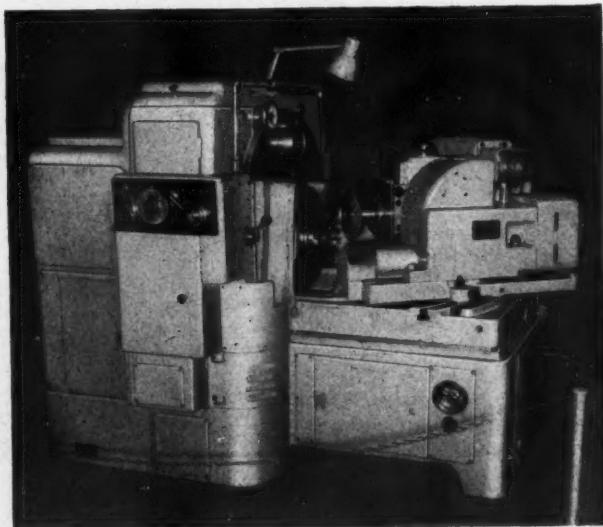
Built at the Tientsin First Machine Tool Works, this automatic spiral bevel and hypoid gear generator is similar to a machine developed by the ENIMS research station, Moscow
